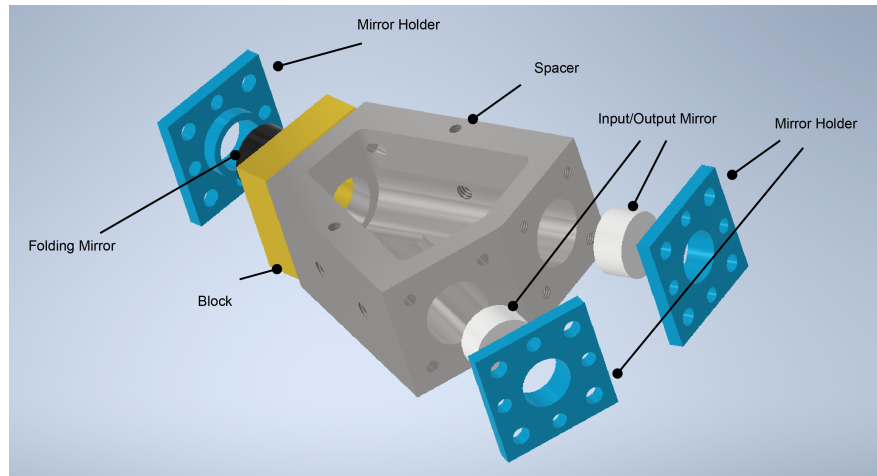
3D CAD of exploded view of the folded cavity. The color of each component is displayed just for distinguishing the parts. The input and output mirror is glued on the mirror holders
